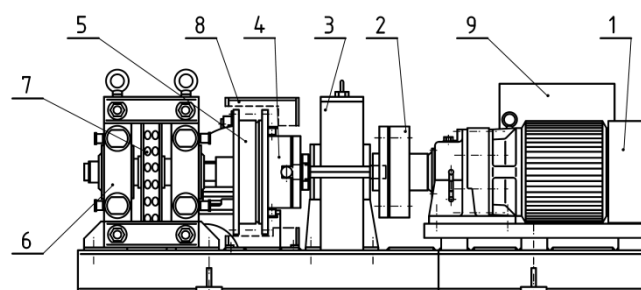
The scheme of laboratory roller press (LPW 450): (1) gear motor with a cycloidal transmission, (2) flexible clutch, (3) gearbox, (4) Oldham clutch, (5) friction clutch, (6) moulding rollers cage, (7) forming rollers, (8) safety cover and (9) hydraulic system of sliding roller support
